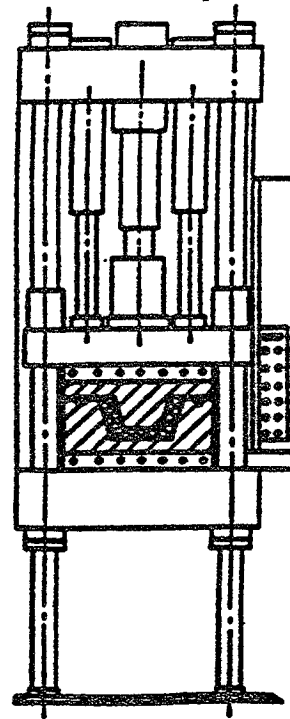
Press for compression moulding shown with mould closed and moulding material formed into shape.
